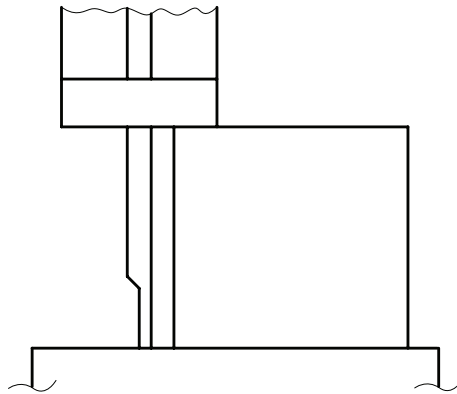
Error due to crossed knife-edge internal measuring faces in small holes
